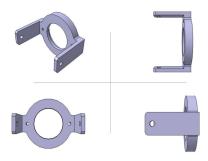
(b) Isometric, back and side views of the custom-made bracket.
